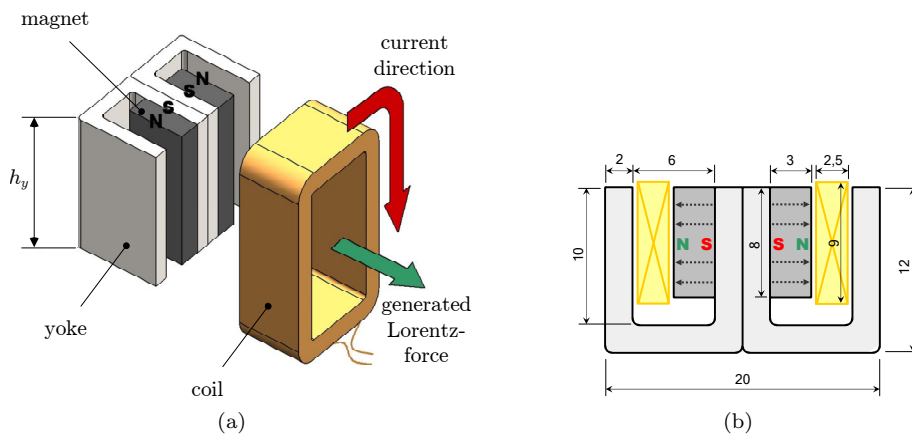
Exploded view of the designed actuator (a) and the dimensions in mm (b)
